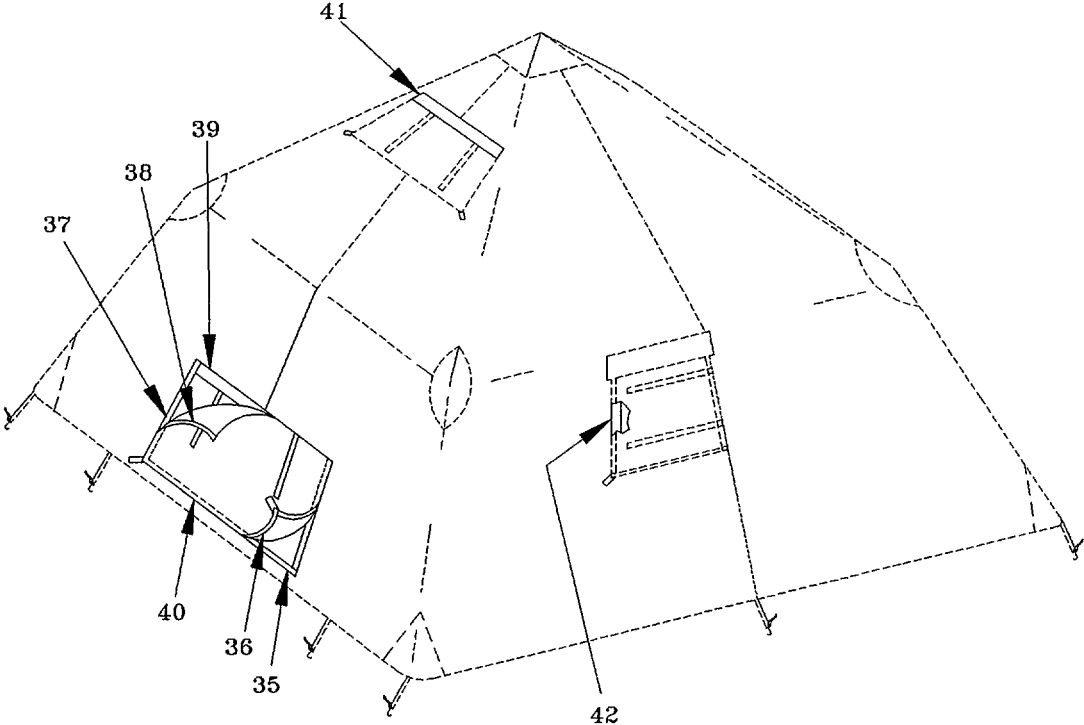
FLY ASSEMBLY (Sheet 2 of 2)
